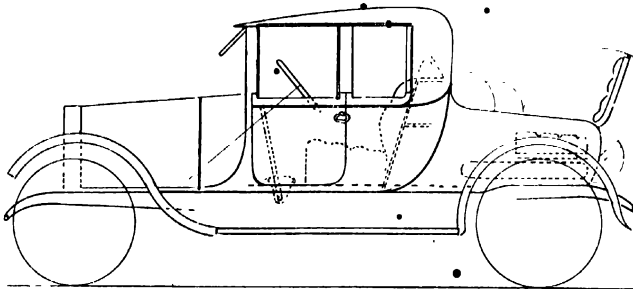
Sectional Elevation of 2/3-seater Coupé with Dickey and Wheel Space Inside.
